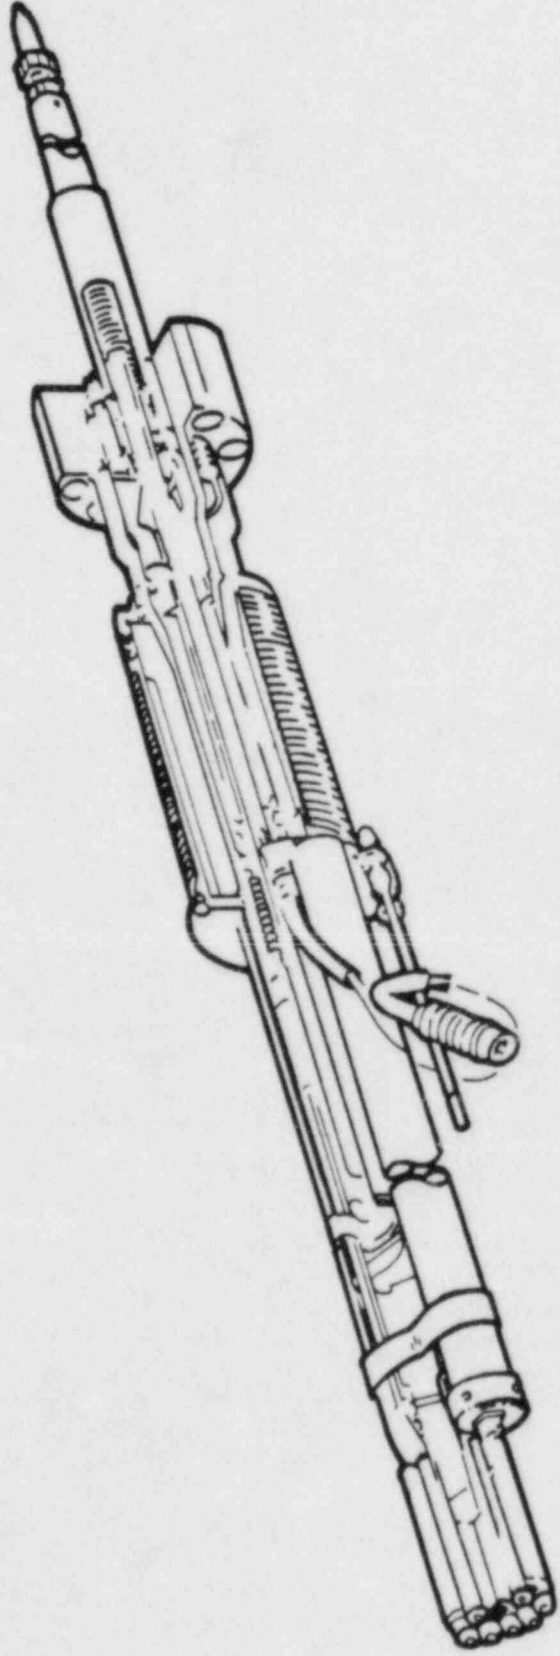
Canned Rotor Control Rod Drive, Cutaway Diagram
